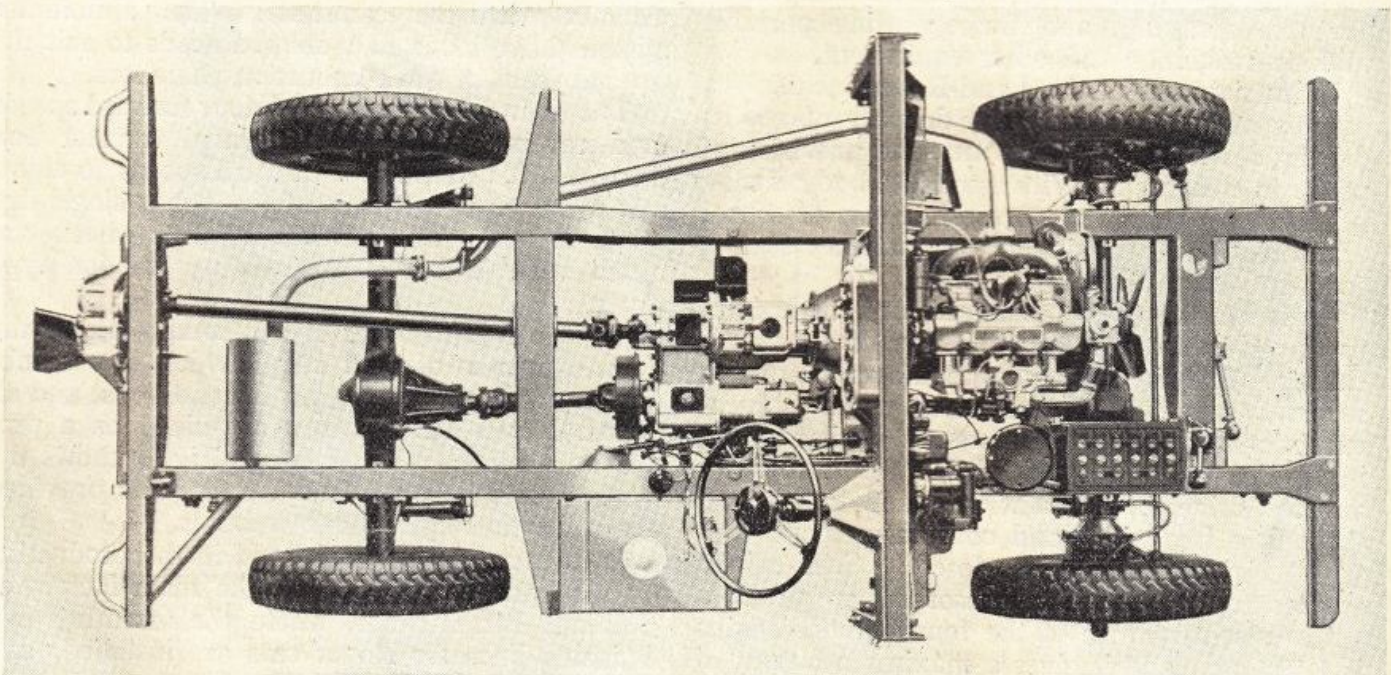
Plan View of the Chassis of the Land-Rover showing the Engine, Gear Box, and Transfer Gearbox. A Power Take-off is provided for Driving various types of Machinery
